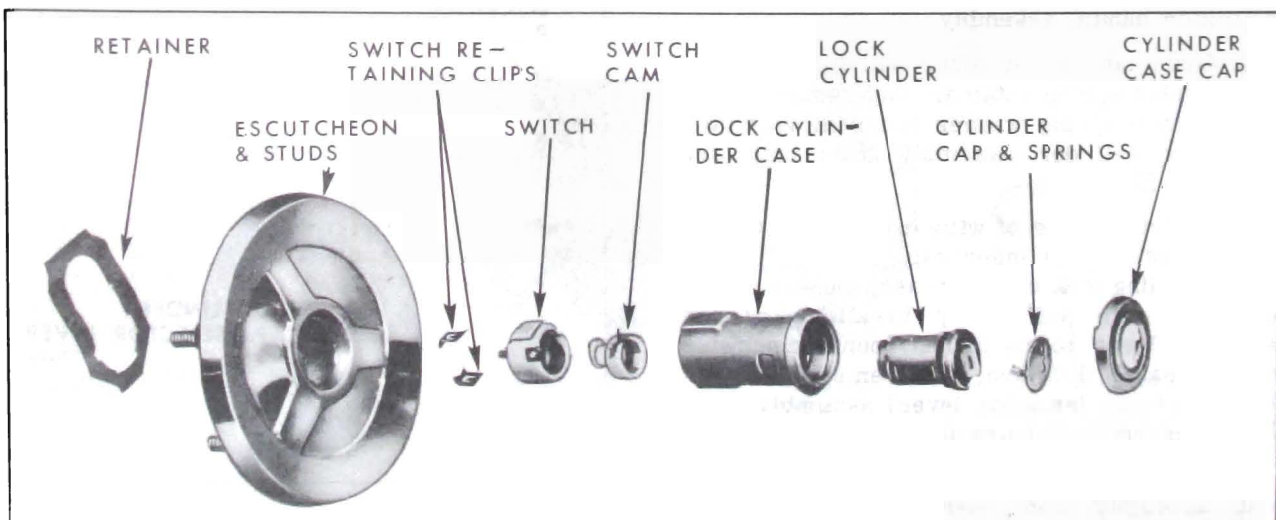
Disassembly of Window Electric Lock Cylinder and Switch
